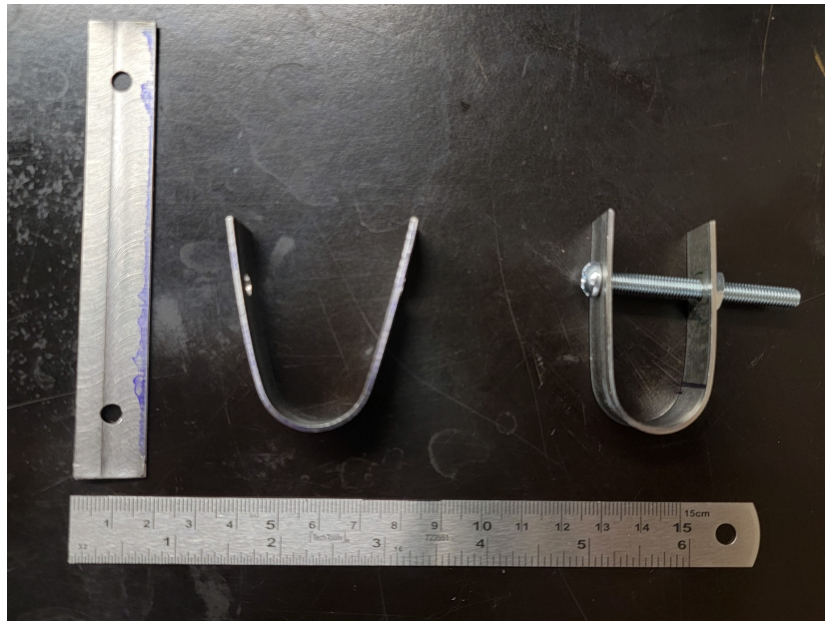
Left: U-bend samples before bending. Middle: U-bend samples after first stage bend. Right: U-bend samples completely bent and bolted to retain shape.
